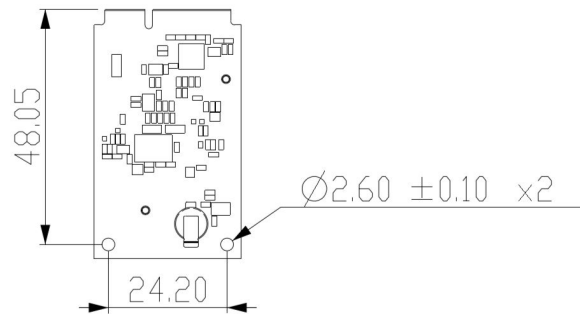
PGM Dimensioned Drawing With Heat Sink (Units in mm)
